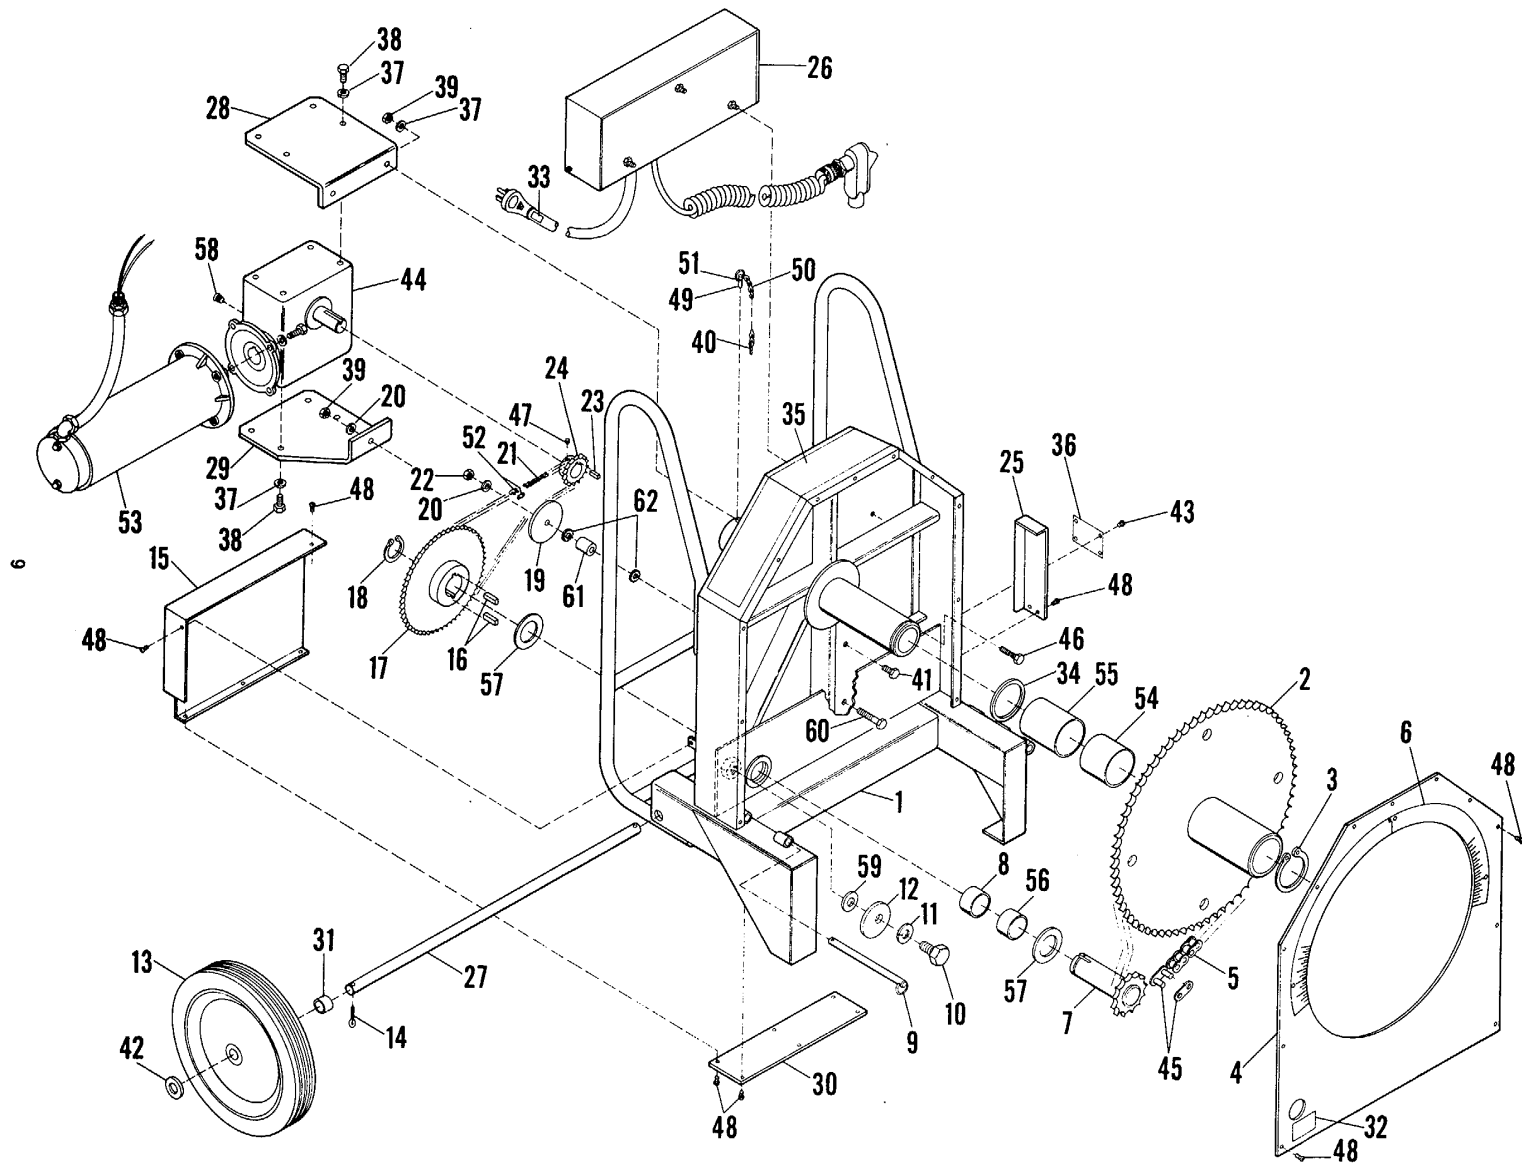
Exploded View No. 555 Electric Bender Eff. S/N PL24101
